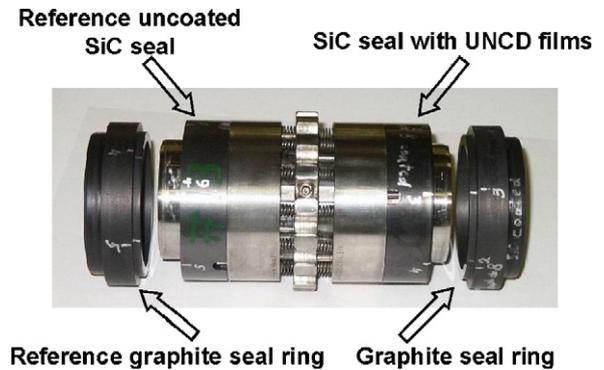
Main shaft of the seal testing machine with UNCD-coated seal (right) and reference uncoated SiC seal (left) running against fixed graphite rings (both sides).
